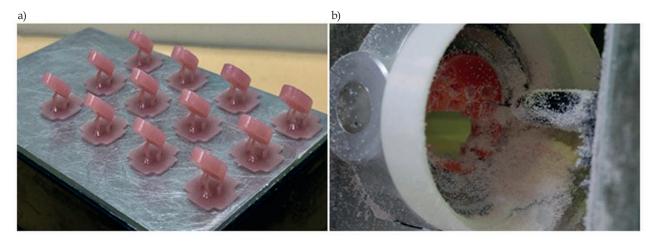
a) 3D-printed acrylic resin specimens; b) CAD/CAM milling of the PMMA blanks
